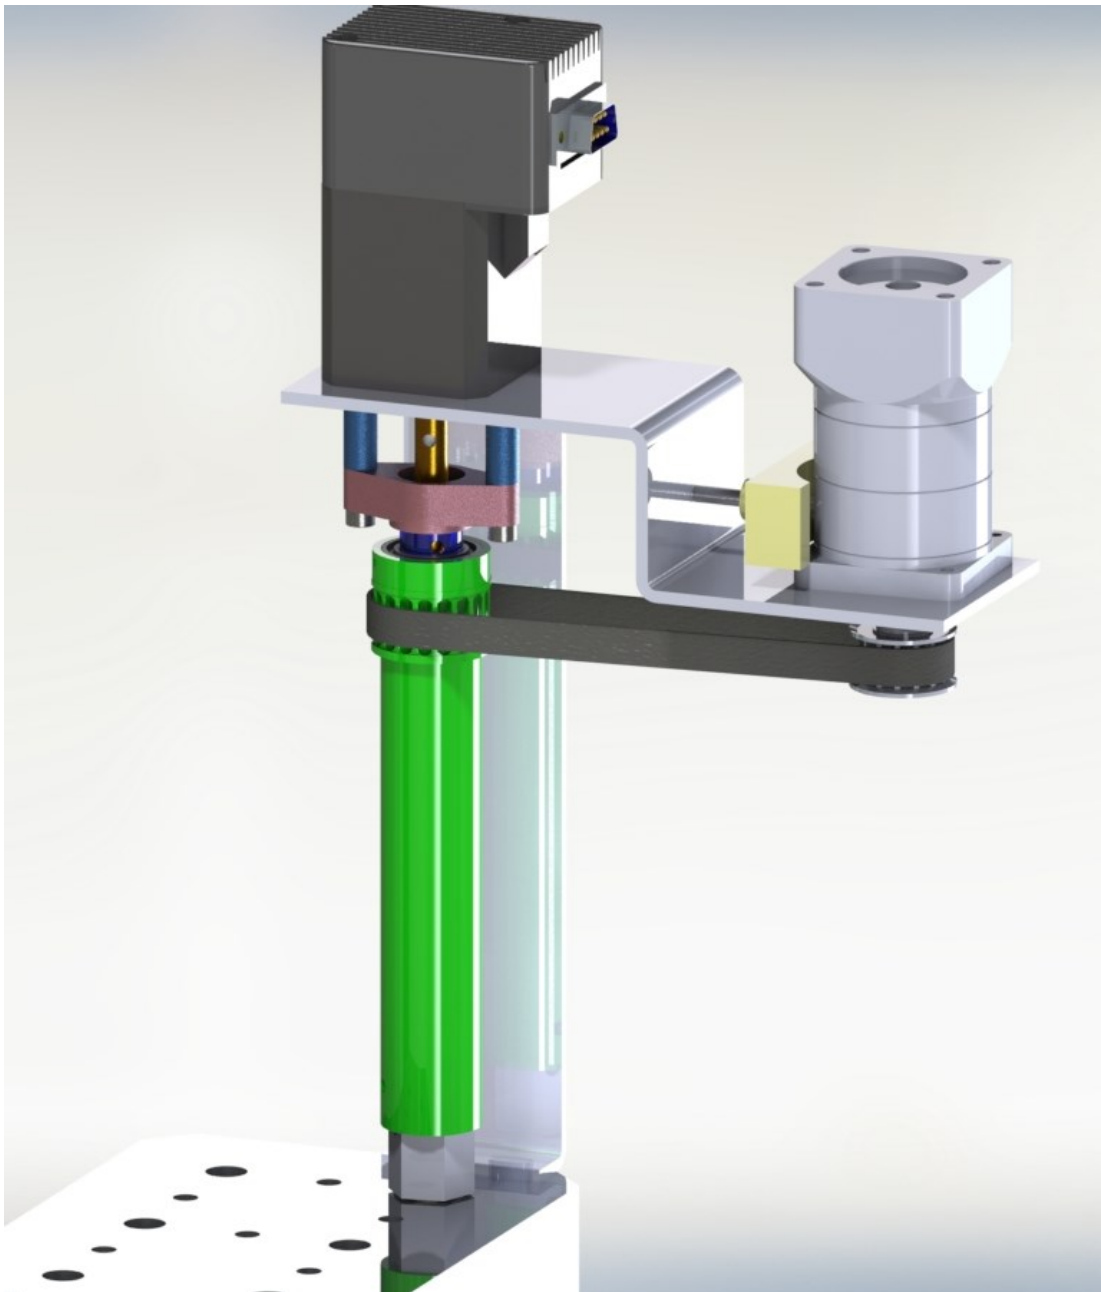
Coaxial screw/nut driver 3D drawing.
